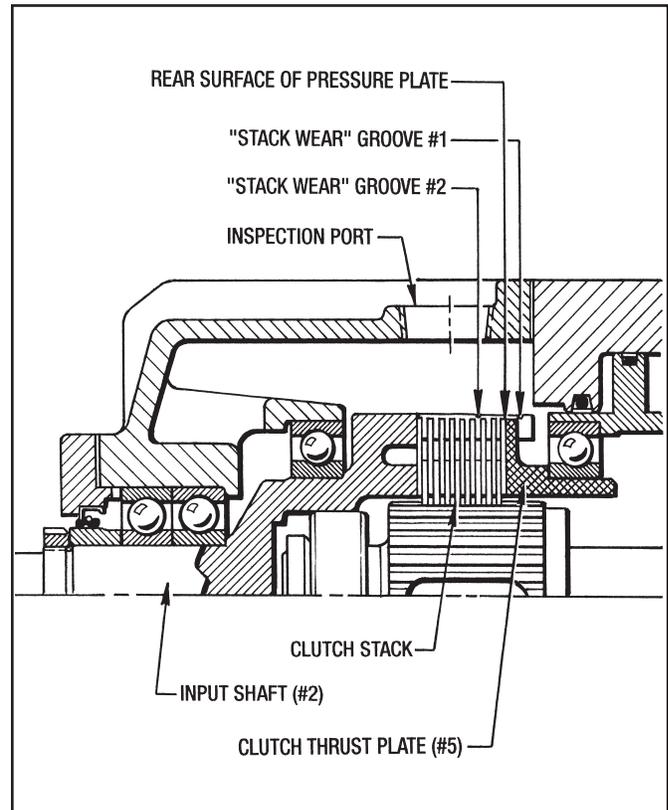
Checking Brake and Clutch Stacks for Wear
